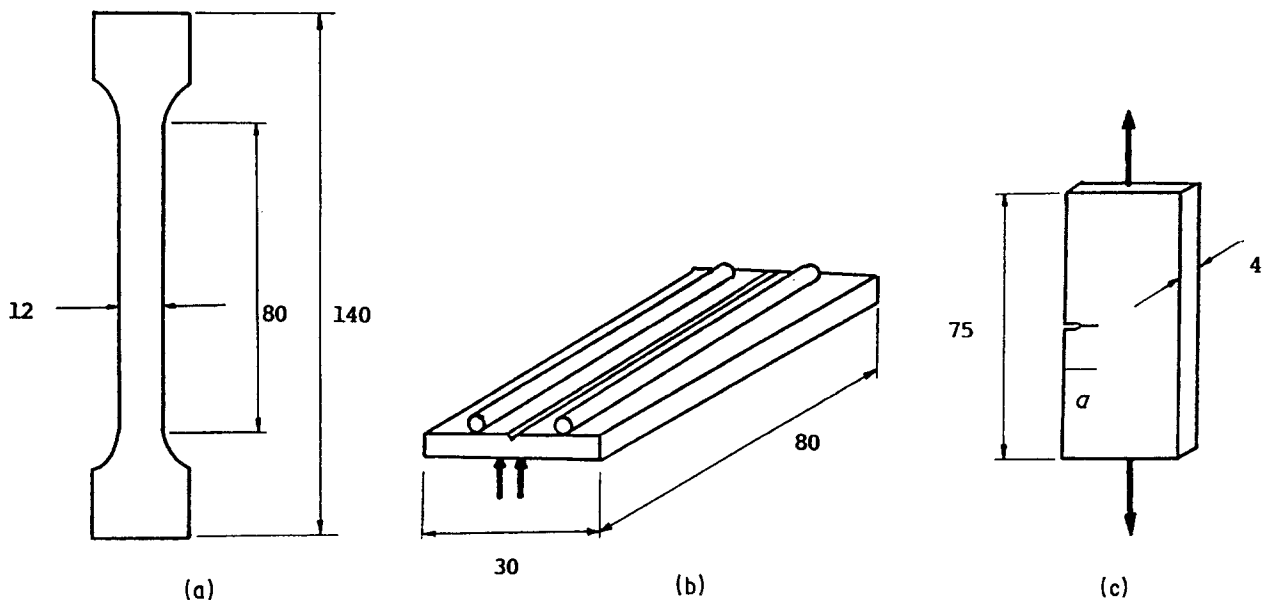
Specimen geometries used in the fracture tests: (a) standard tensile specimen, (b) double-torsion specimen, (c) single-edge-notch specimen. Dimensions in mm.
